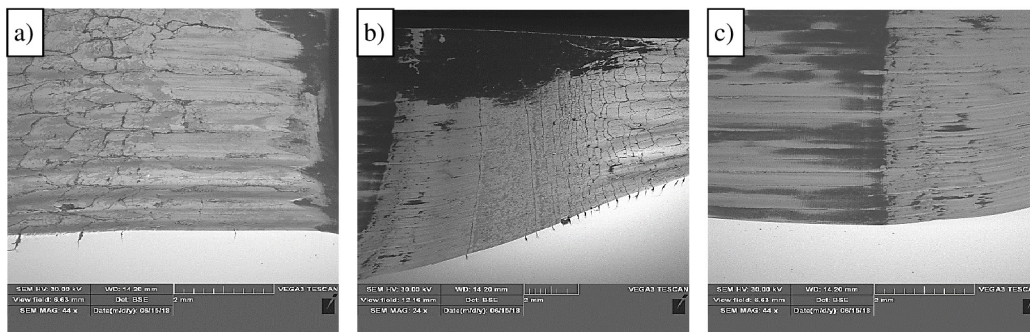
View of the analyzed die surfaces after producing 1900 forgings: a) zone I, b) zone II, c) zone III
